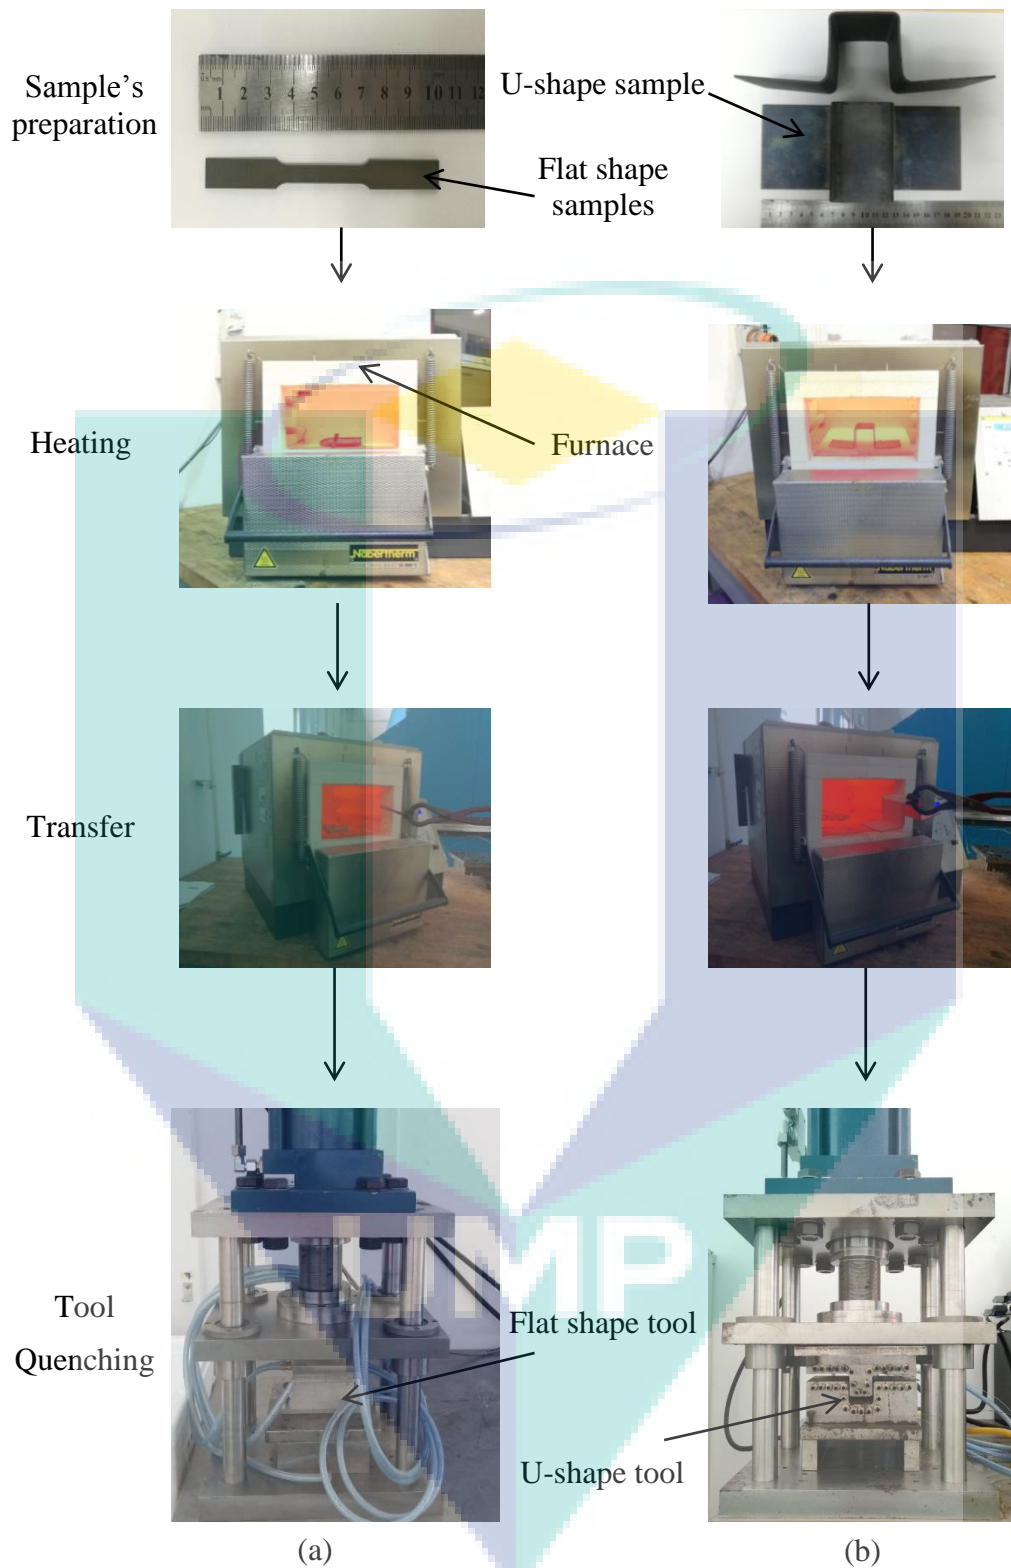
Hot stamping process flow for (a) Flat shape; (b) U-shape sample
